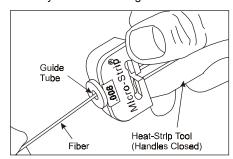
Heat-Strip Tool - Removing Fiber Coating from Buffered Fiber
